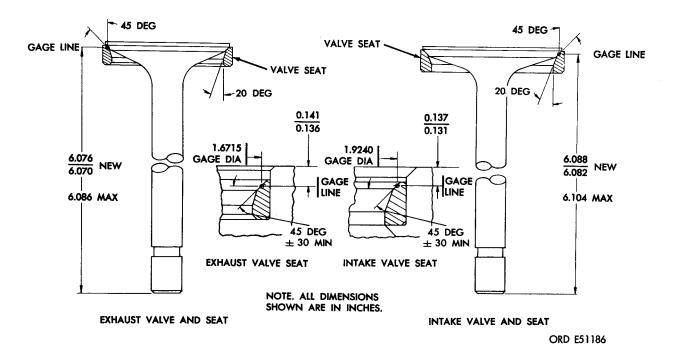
INTAKE AND EXHAUST VALVE FACE AND VALVE SEAT GRINDING DIAGRAM.
